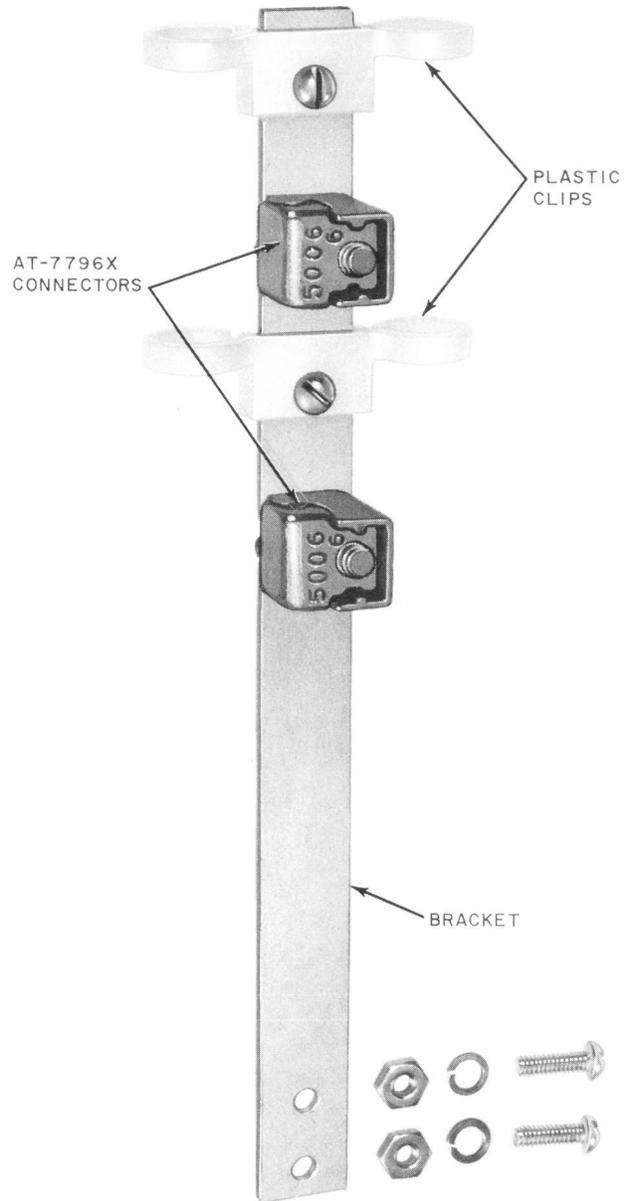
Bracket Assembly for LD-Type Cable Closure
